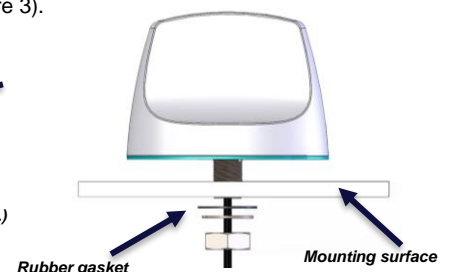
IP67-rated when rubber gasket is mounted on this side of the hard-mounting surface.
